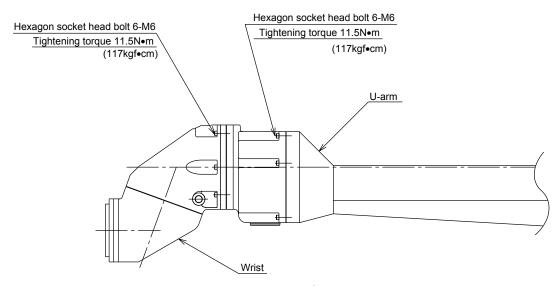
Wrist Fixing Bolts (for PX2850-B10)
